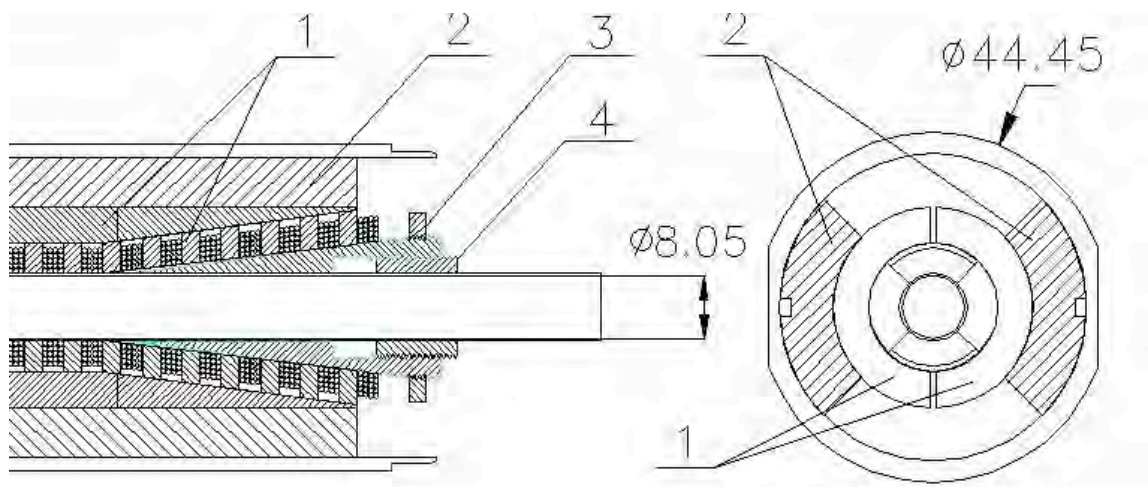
Details of cold mass design at the fringe with conical tapering. 1–Iron yoke, 2–Copper collar, 3, 4–trimming Iron nuts. Inner diameter of Copper vacuum chamber is 8.05mm clear.
